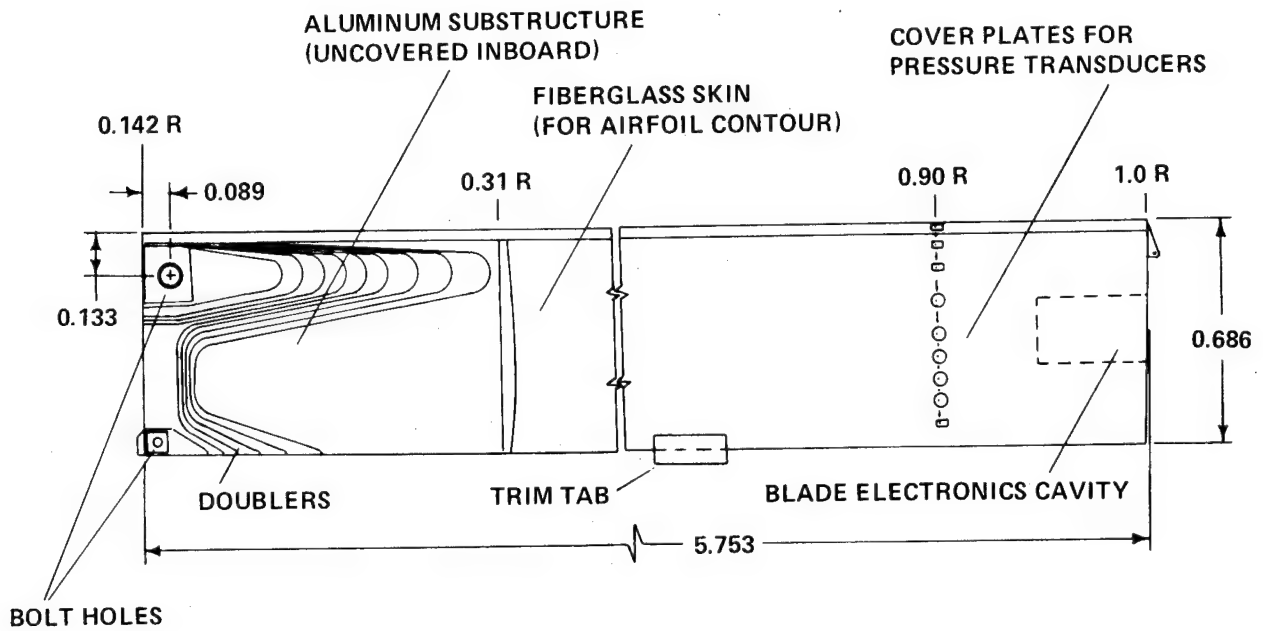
Planform of AH-1G main-rotor blade showing pressure transducer locations for airfoil tests. Dimensions in meters.
